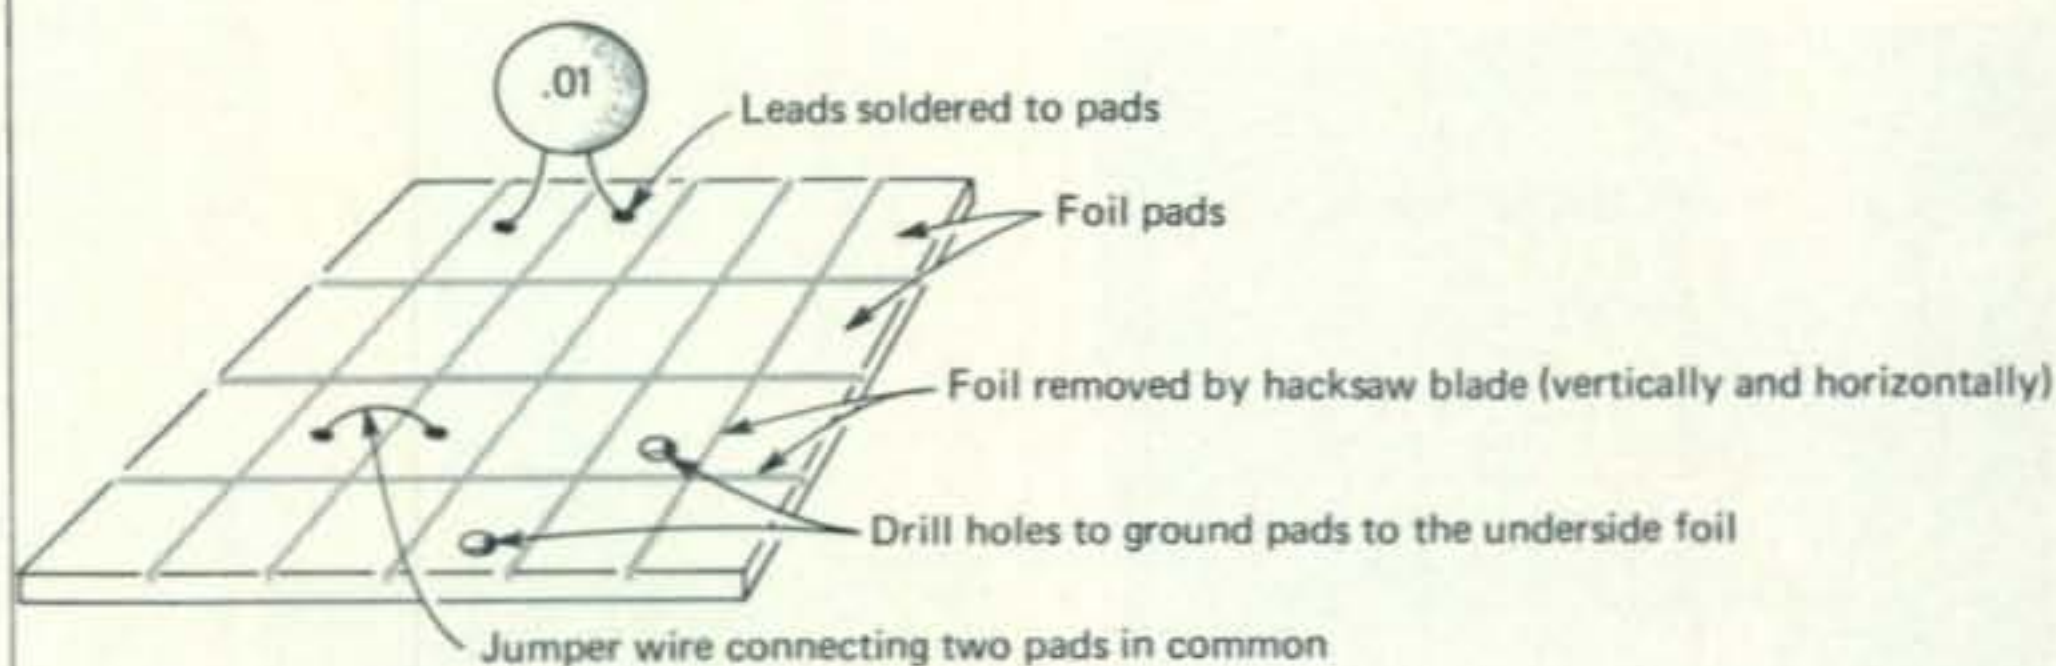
"Breadboard" from double-sided p.c. board stock. The foil is removed in a criss-cross pattern by using a sharp hacksaw blade drawn carefully across the foil. Start the cut at one edge and gradually extend the cut across the width or length of the board. To ground the pads to the underside foil, drill holes through the top and bottom foil, pass short bare wire through the hole, and solder to both sides. The underside foil is left intact.
